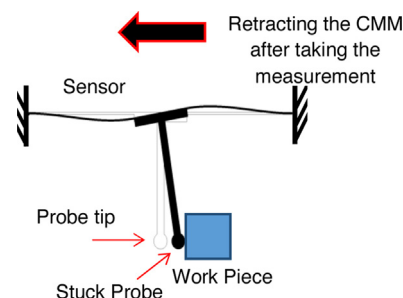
Large probe deflections induced as the CMM retracts the probe from a surface following a measurement.
